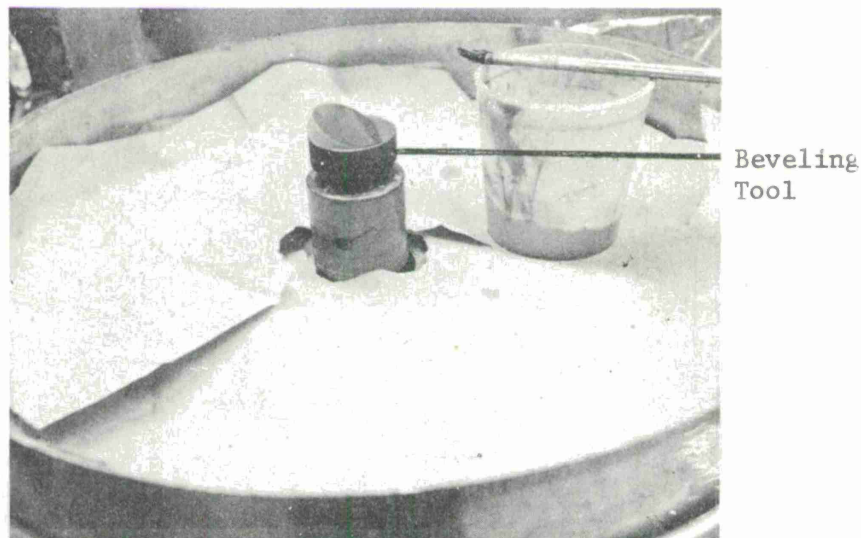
Tool Used for Beveling the Edges of the Fiber Optic Blanks
